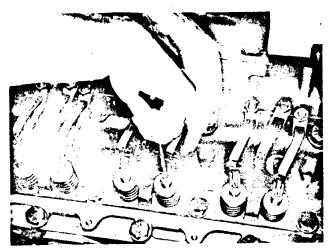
, (V51490). Adjusting crossheads -- V-903
